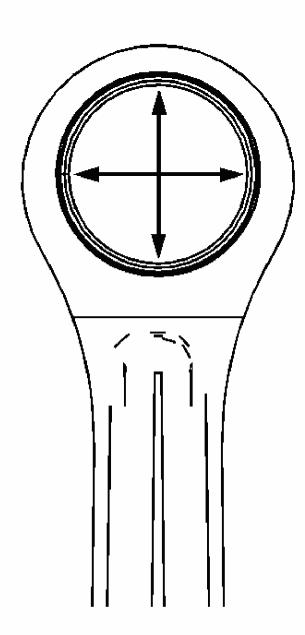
Checking Connecting Rod Piston Pin Bore Dimensions Courtesy of GENERAL MOTORS CORP.
